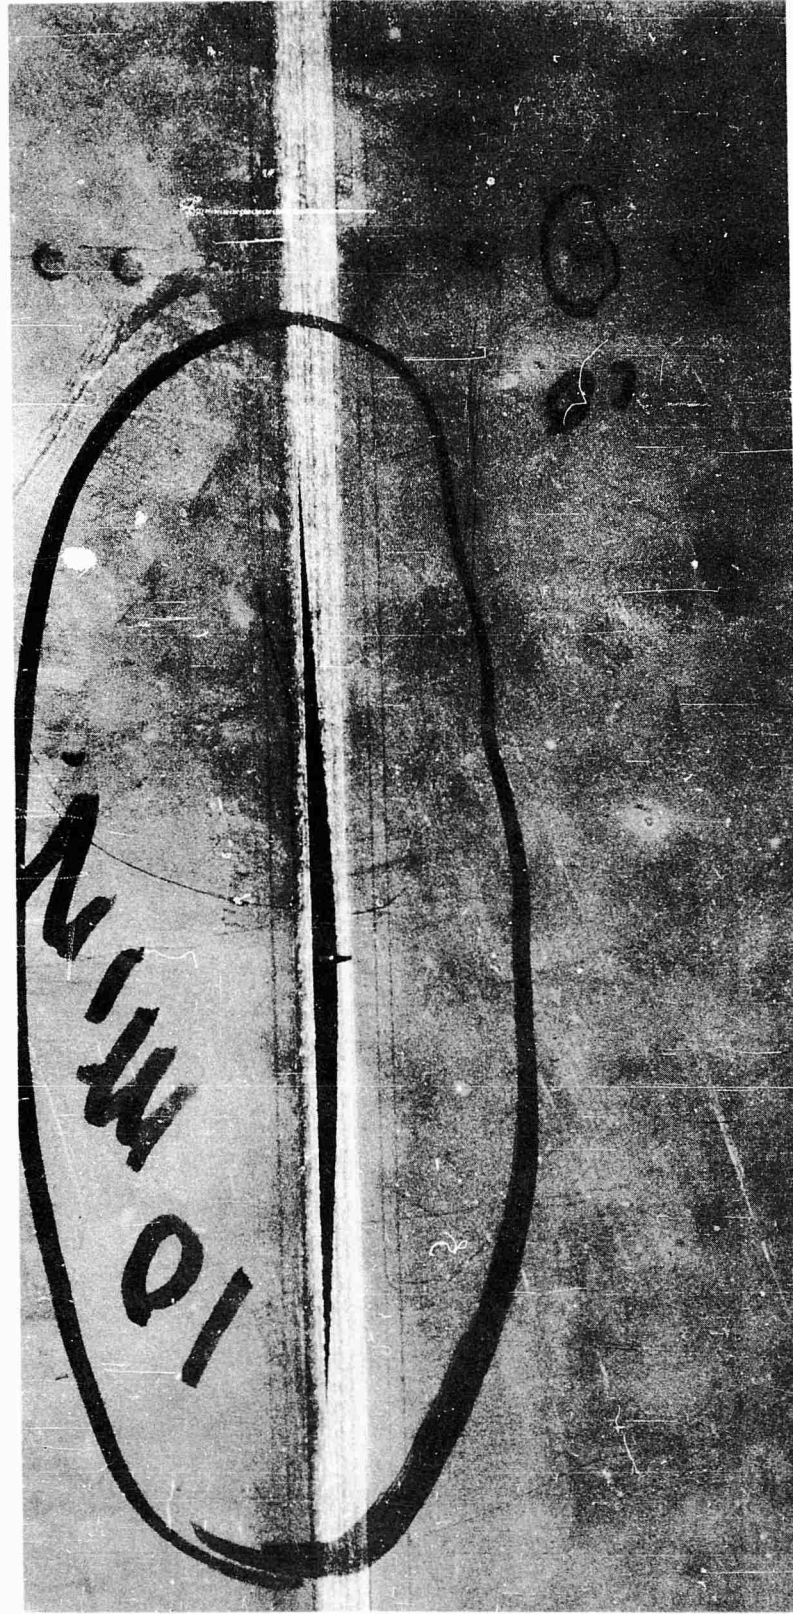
SKIN AND STRINGER FAILURE SKIN AT WELD (2)
